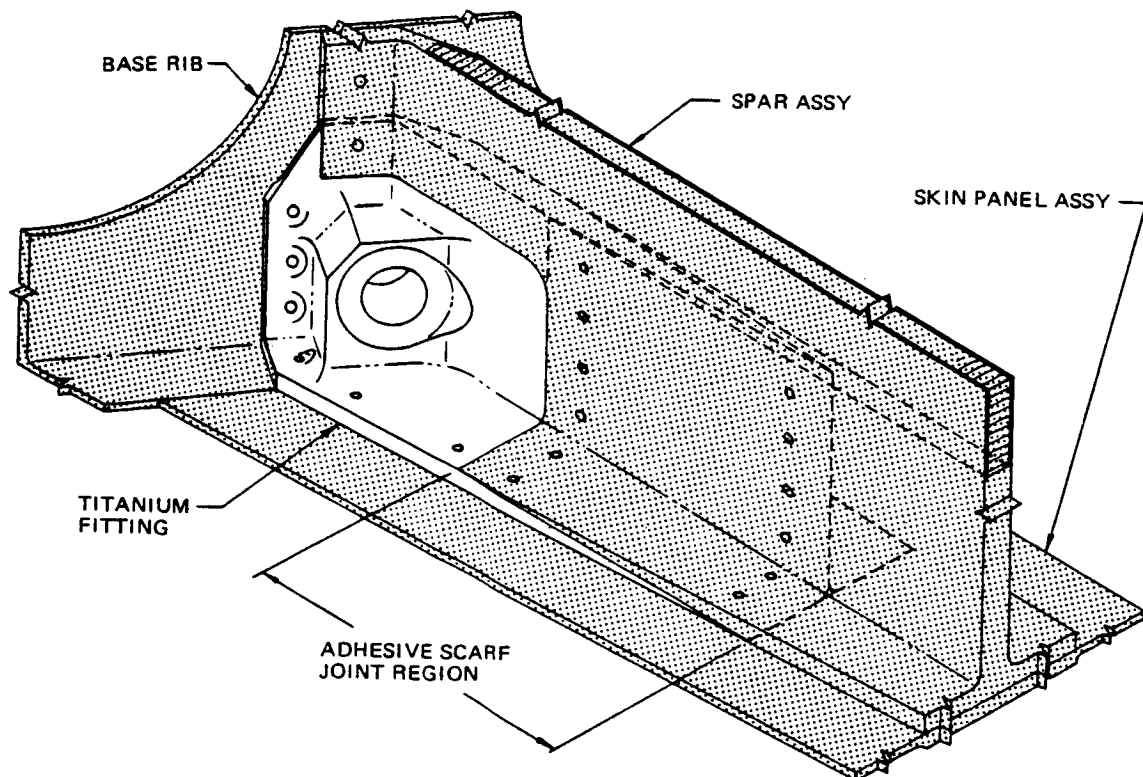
SPAR-ROOT FITTING SPLICE-JOINT DETAILS
